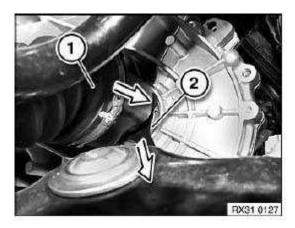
Identifying Output Shaft And Guard Courtesy of BMW OF NORTH AMERICA, INC.
